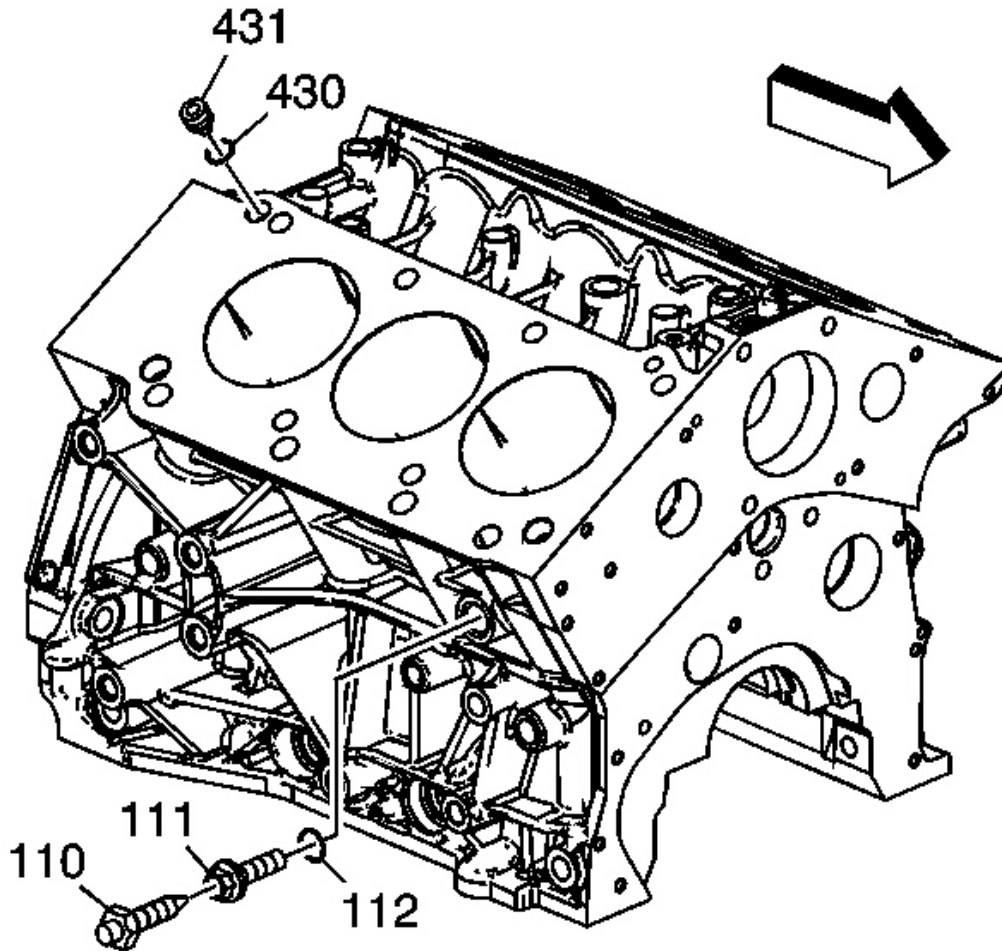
Identifying Restrictor, O-Ring, Washer, Fitting & Drain Plug
